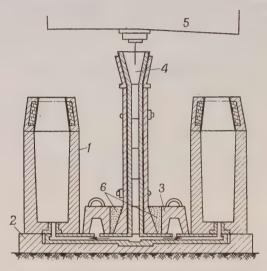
Bottom-pouring arrangement: 1—mould; 2—bottom plate (or mould stool); 3—slag catcher; 4—fountain or trumpet; 5—ladle; 6—refractory ramming
